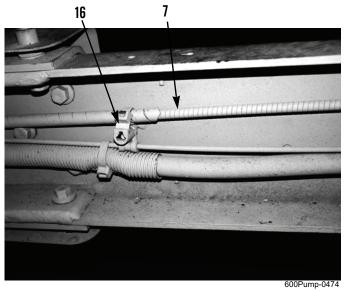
Hand Brake Cable Sheath Along Trailer Frame.
